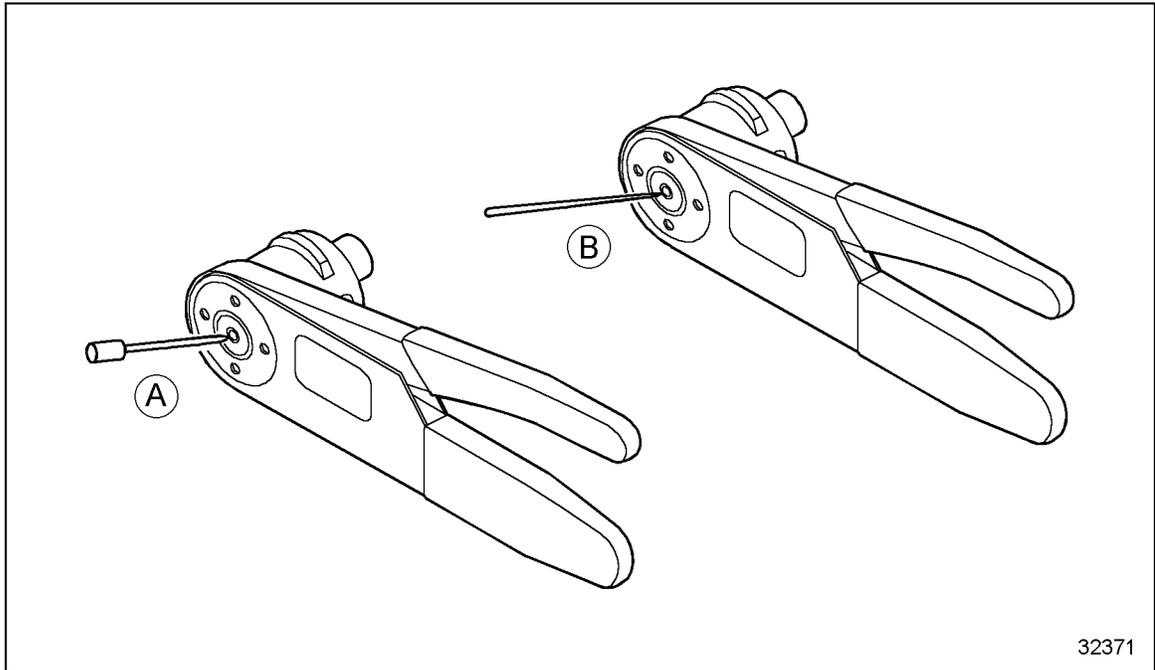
Inserting the Terminal and the Stripped Wire.
